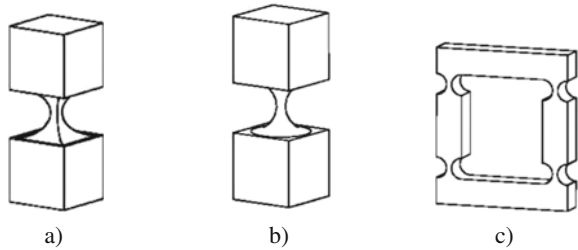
Examples of universal (a), spherical (b) and prismatic (c) compliant joint
